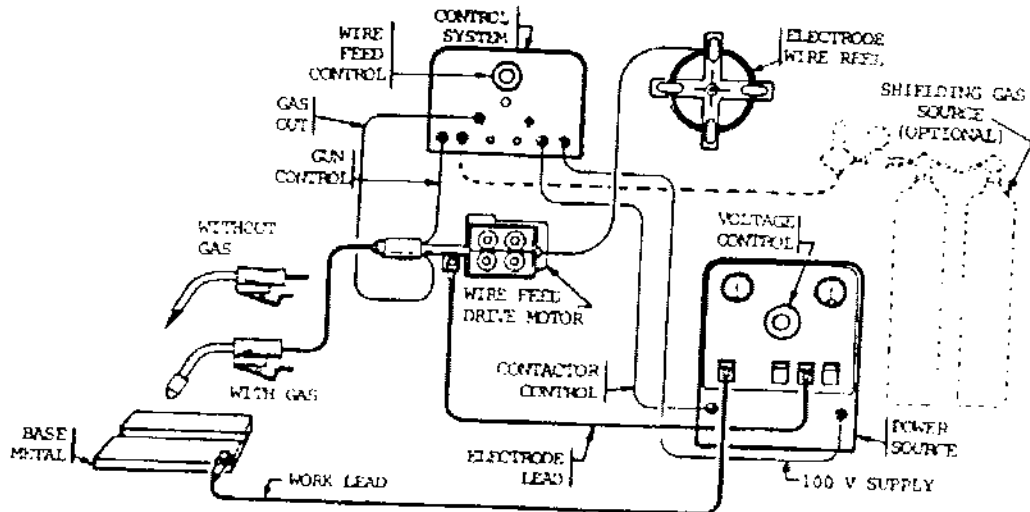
EQUIPMENT USED FOR SEMIAUTOMATIC FLUX-CORED ARC WELDING
